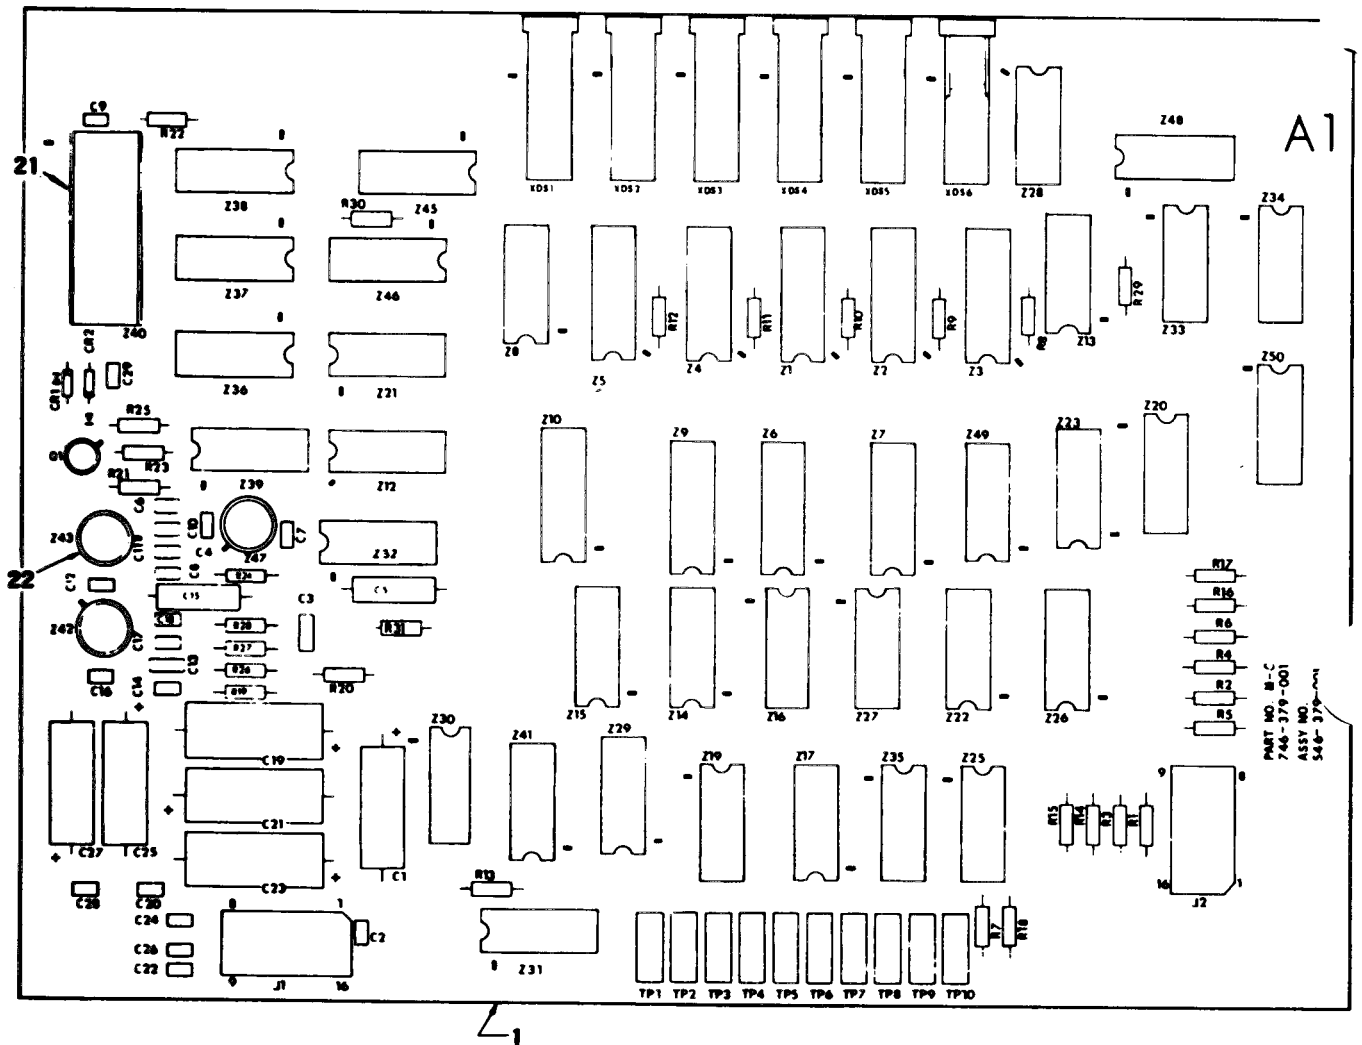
Digital P.C. Board A1 (Sheet 1 of 2)
